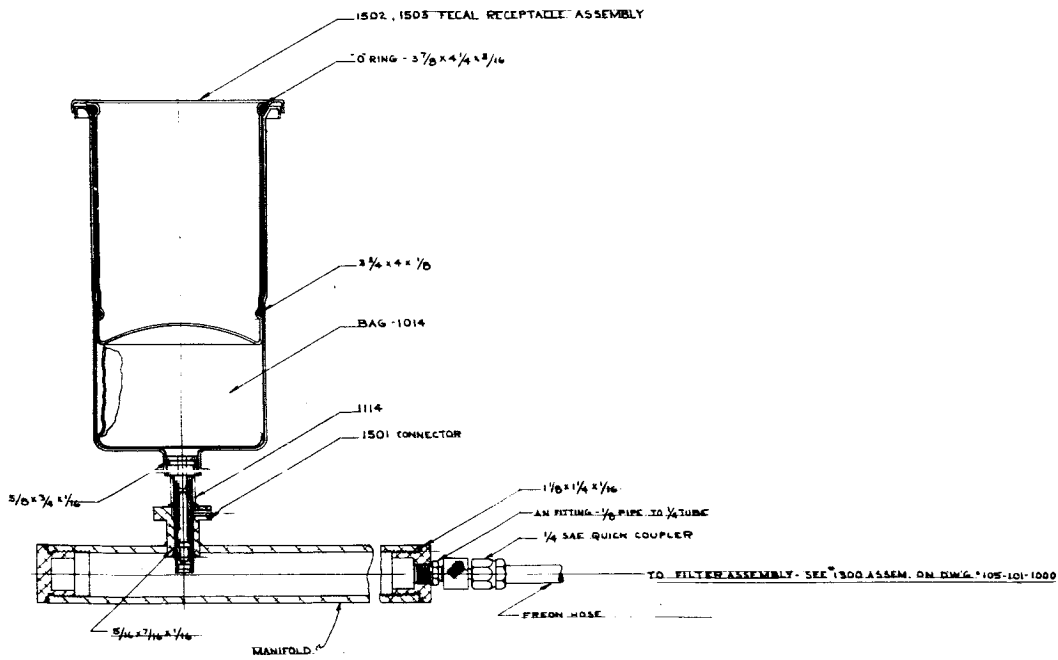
ASSEMBLY DRAWING OF FREEZE-DRY TYPE FECAL COLLECTOR
